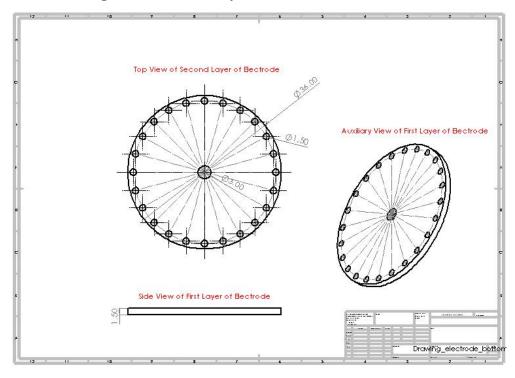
Electrode Layer (4) – 3D Printed PLA Shield
